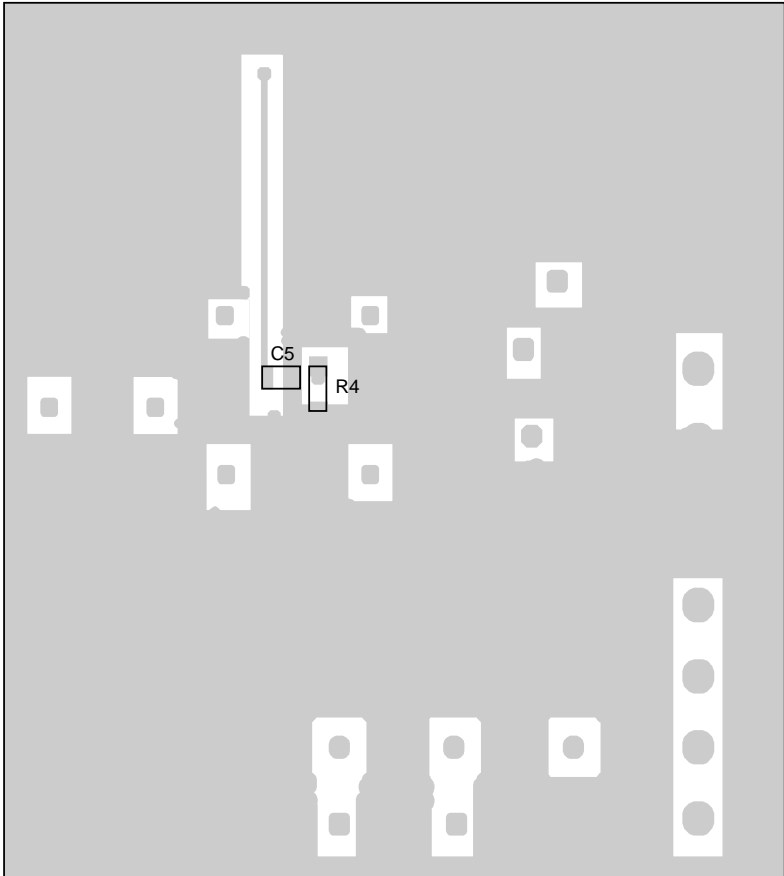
PCB top view with components for LQFP32; test circuit Fig.5.
